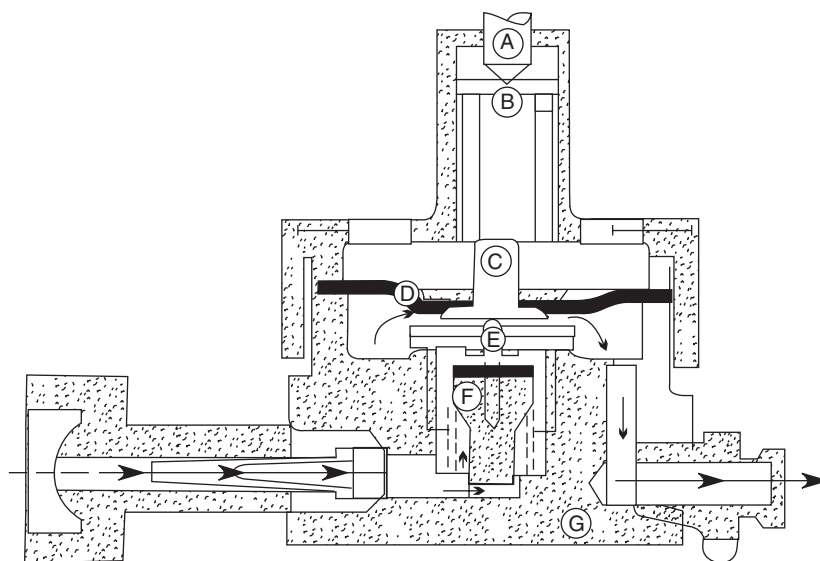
Pressure regulator (BOC) (A . pressure adjusting screw, B. Spring centre, C. Diaphragm carrier, D. Diaphragm, E. Pin, F. Valve assembly, G. Regulator body)
